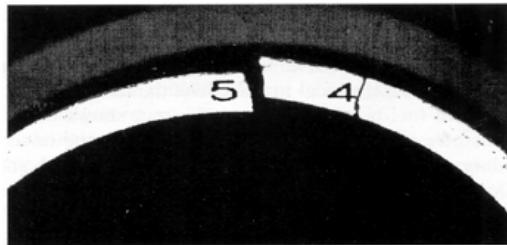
Crack tip from test REP-Na1 (Table 1) showing brittle character of a PCMI fracture.
